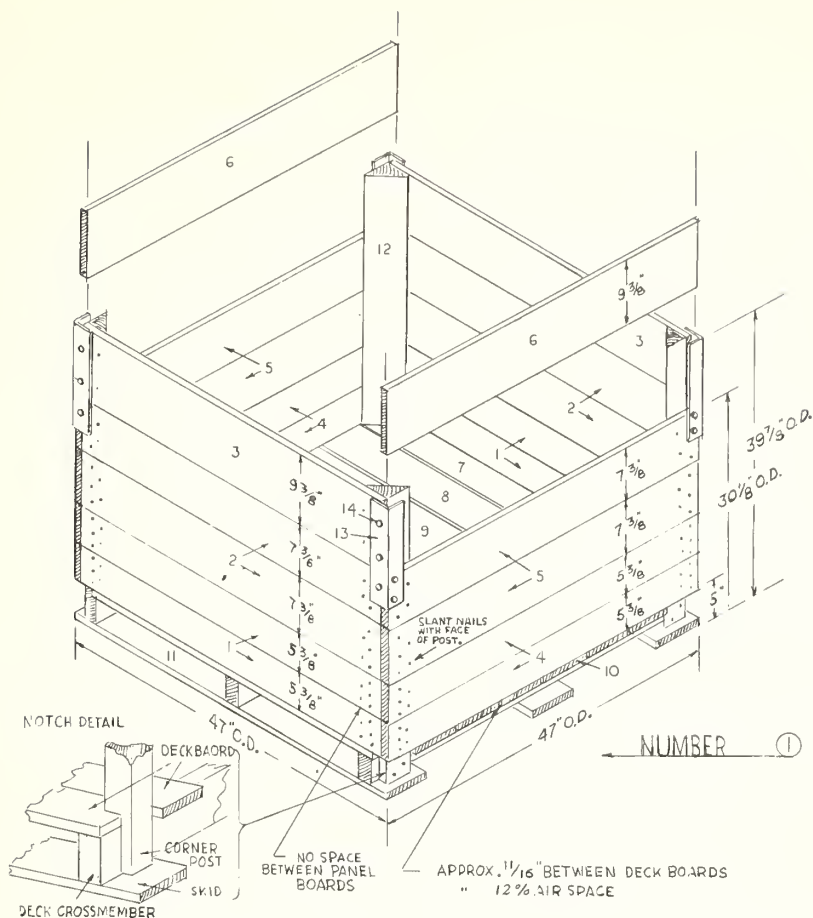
Test pallet box No. 1 with solid sides and spaced bottom with two removable 9½-inch end sections, and an inside depth of 34¾ inches.
